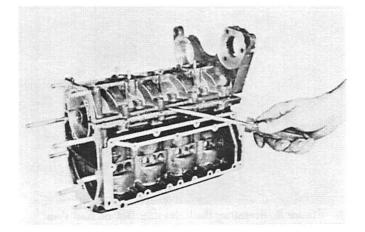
Separating Crankcase and Cylinder Block Page 26 Master Service Manual
